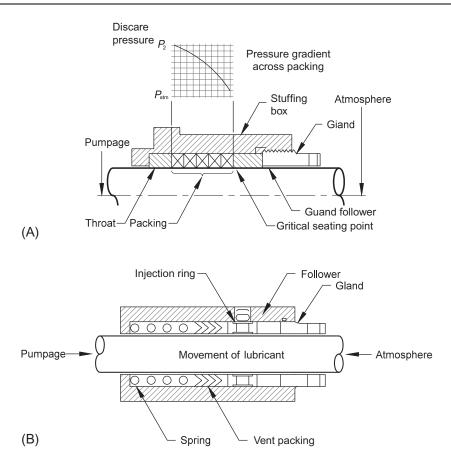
Schematic of general packing arrangement. (A) Square cut packing; (B) Chevron packing.
